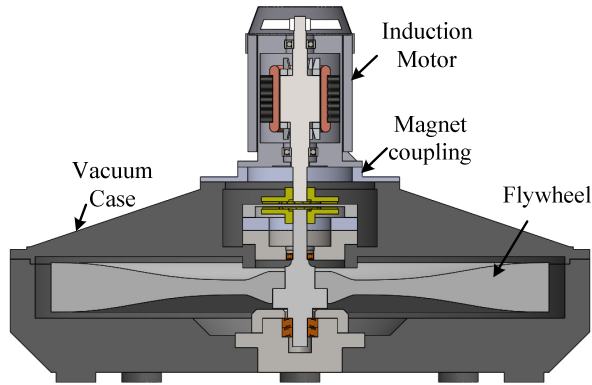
Configuration of a proposed flywheel system that comprises a general purpose motor and ball bearings.
